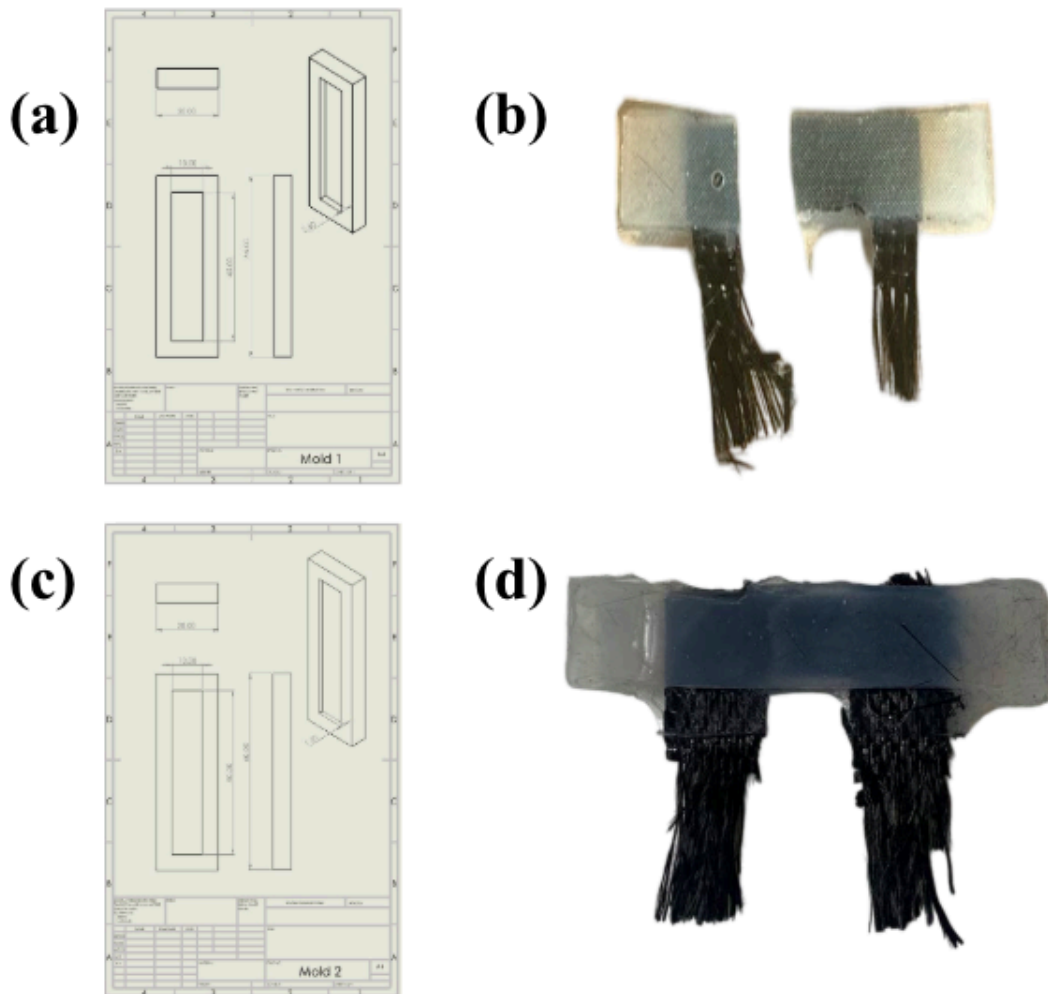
a) Mold of the second strain sensor prototype; b) second strain prototype; c) mold of the final strain sensor prototype; d) final strain sensor prototype.
